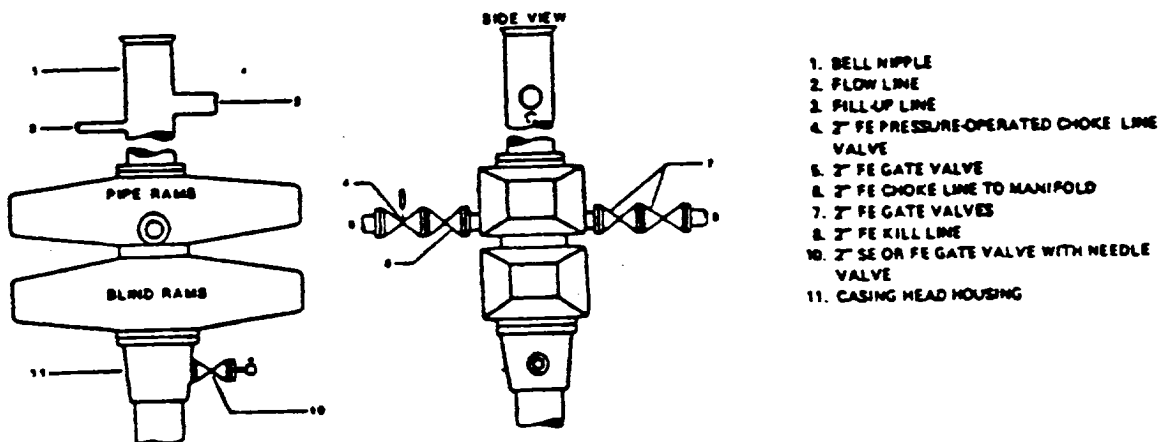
Standard Hydraulic Blowout Preventer Assembly
